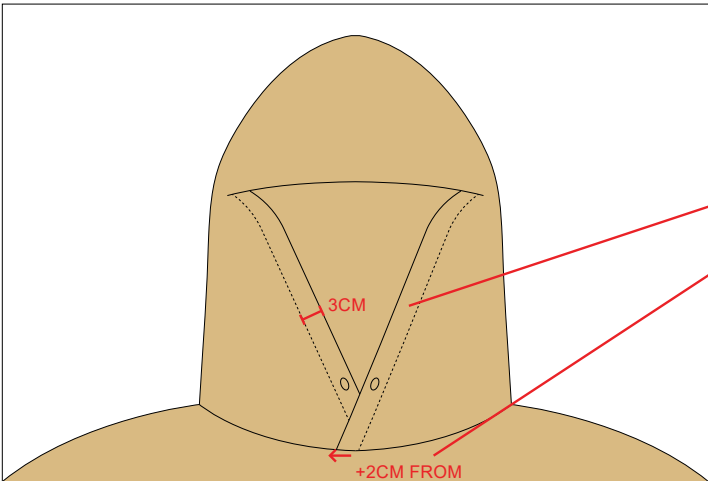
Flats For Tech Pack - Manufacturers/Machinist
